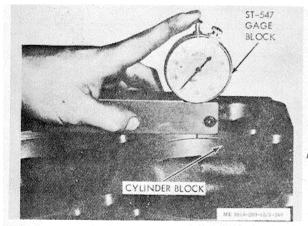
Inspecting liner counterbore depth in block.
